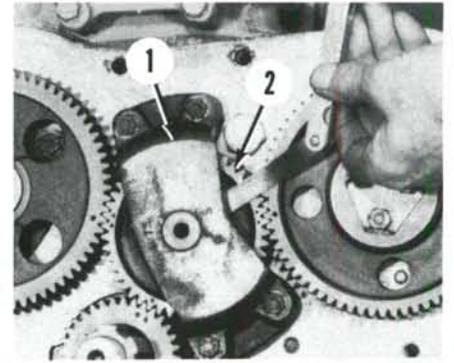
Check clearance between idler gear (2) and support bracket (1) using a feeler gage. Add or remove bracket mounting shims to adjust clearance.
